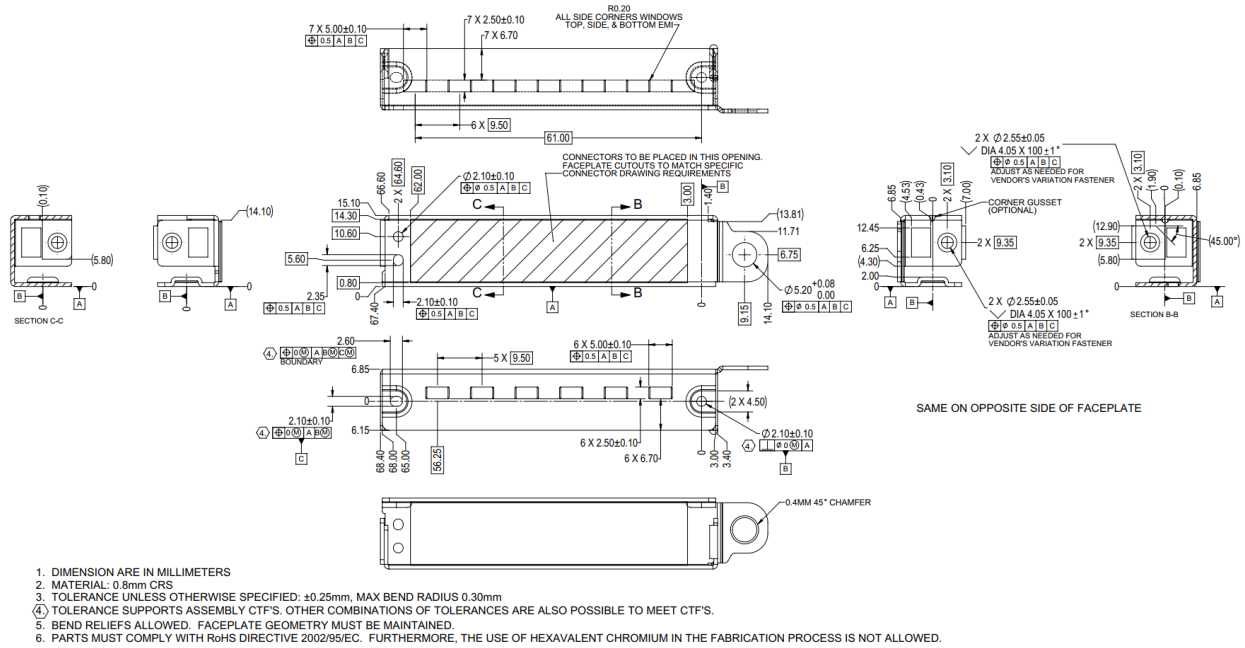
SFF Generic I/O Faceplate – Ejector Version (2D View)
